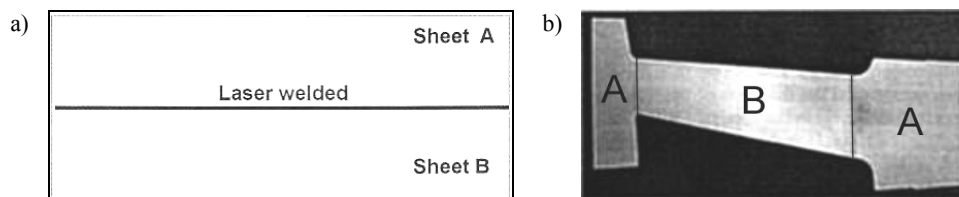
Examples of joining sheet in tailor welded blank type A-B:
